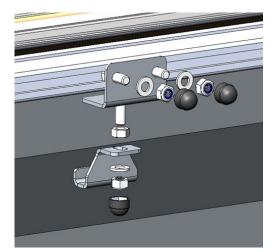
Position the angle bracket over the bolts and fasten using the accommodating washers, nyloc nuts and nut caps. Attach the hook bracket to the underside of the load bin lip and fasten it to the angle bracket using a M8x25 hex head bolt, washers,nylock nut and nut cap.
